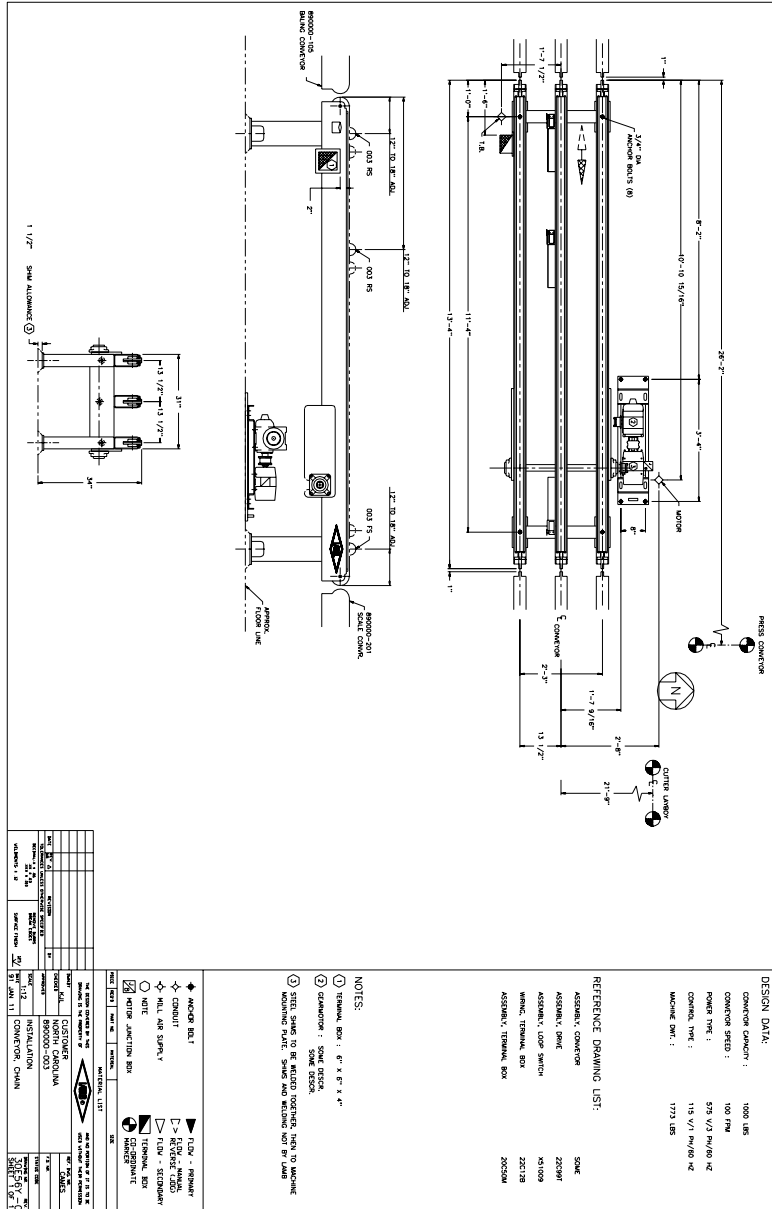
Chain-Conveyor Drawings: Assembly and Installation.
